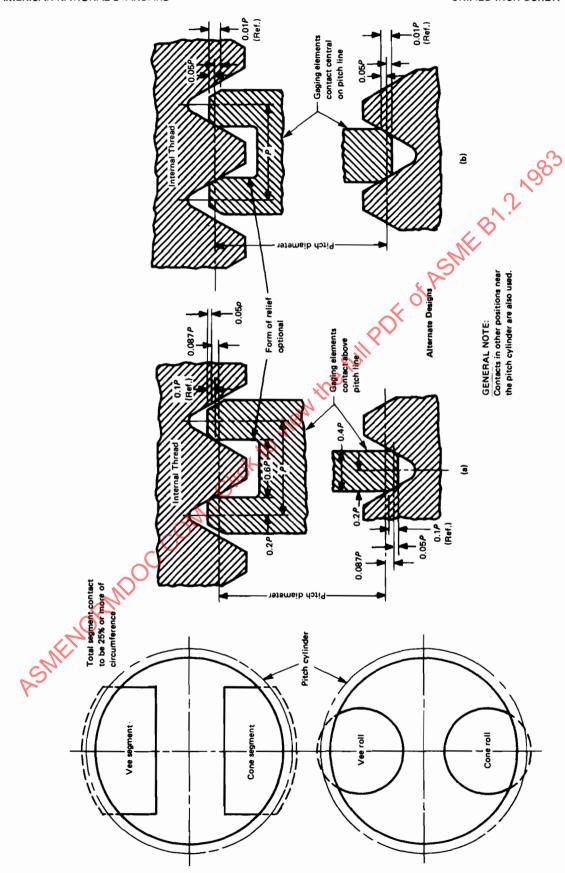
THREAD SNAP GAGES — MINIMUM-MATERIAL PITCH DIAMETER LIMIT — CONE AND VEE
